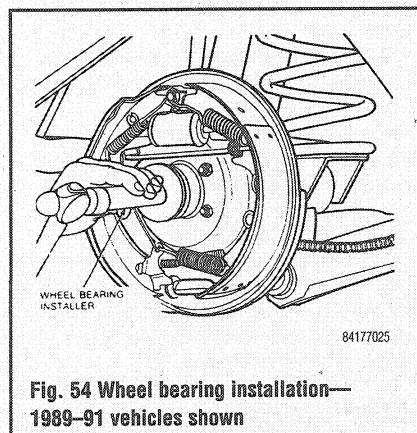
Wheel bearing installation—1989-91 vehicles shown
